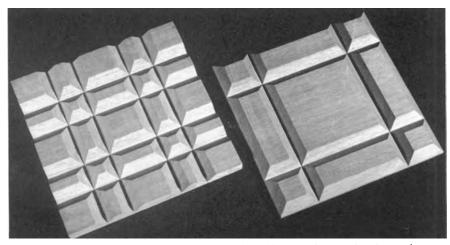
These attractive, faceted panels, which can be used as insets in furniture projects, were surface molded with 90° Vee-knives.
